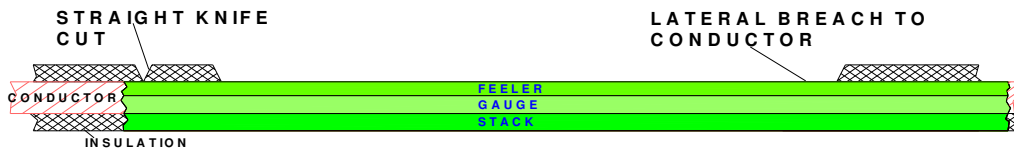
, Drawing of Breach Defect Cutting Geometry.
